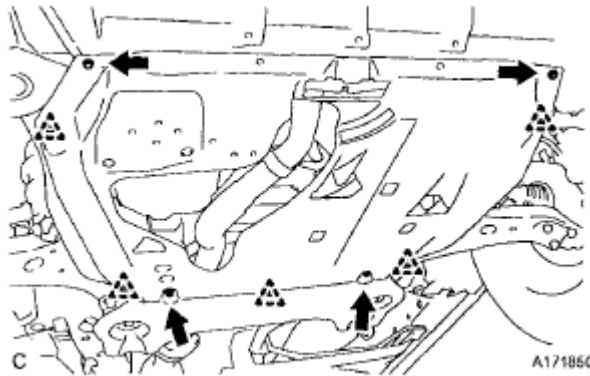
Locating Engine Under Cover Assembly, Bolt And Screw
